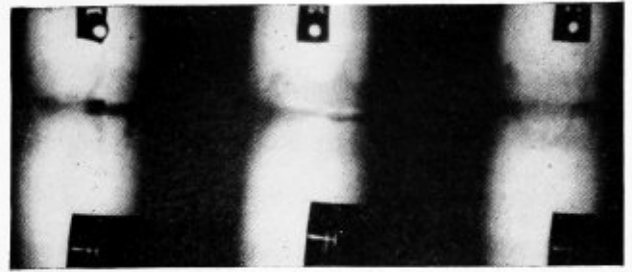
Exograph of thermit weld in a 2-inch pipe
